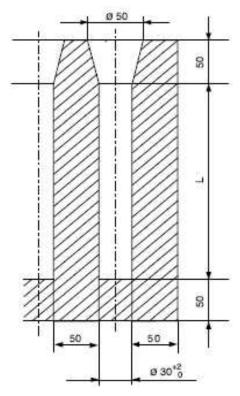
Test sample for grey cast iron (Dimensions in millimeter)
